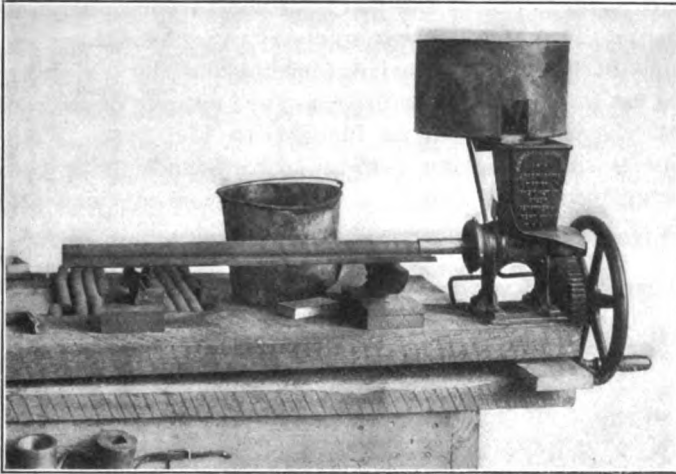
WADSWORTH SCREW-FEED CORE MACHINE MAKING 1-IN. ROUND CORES
